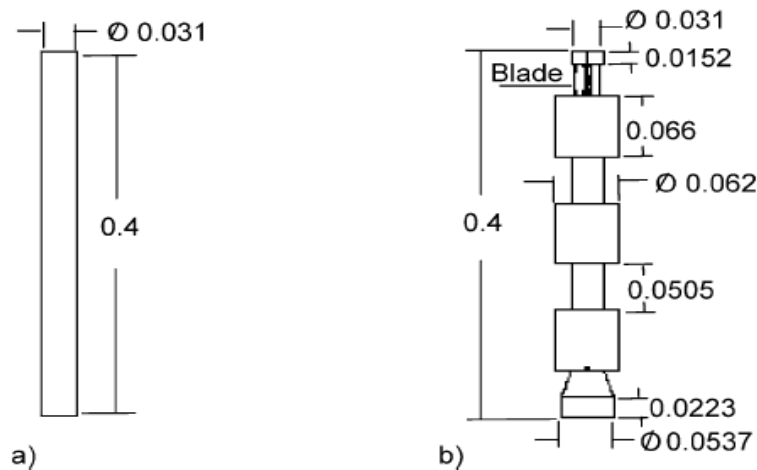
a) Conventional ladle shroud b) swirling ladle shroud(SLS)
